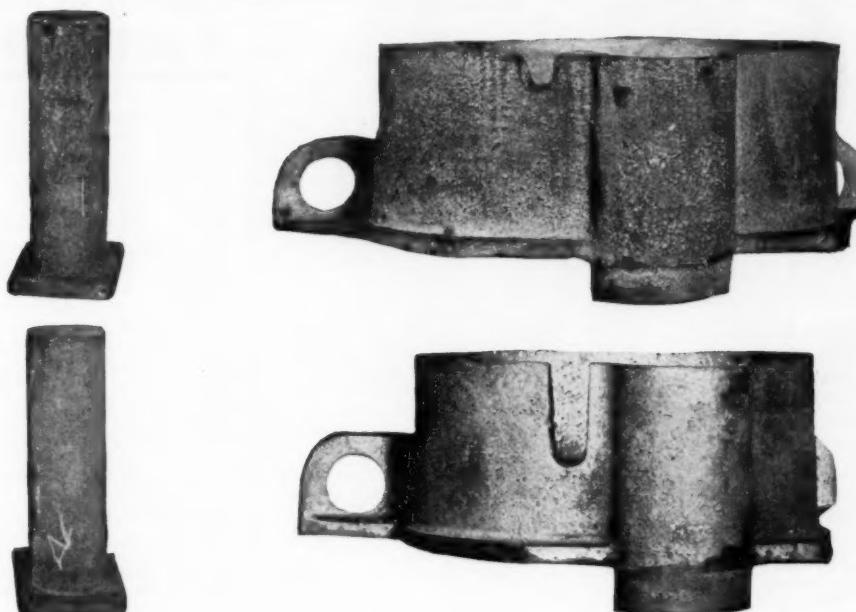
(Above) castings produced from hand-made moulds in comparison with (below) the same castings as produced by machine moulding.
